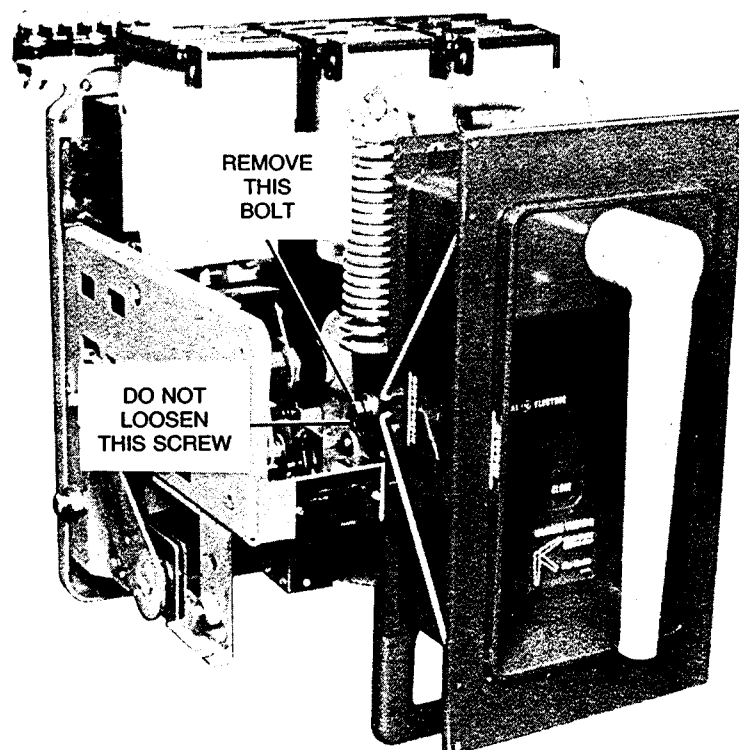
SLOW CLOSING—LOWER SPRING ASM HARDWARE
